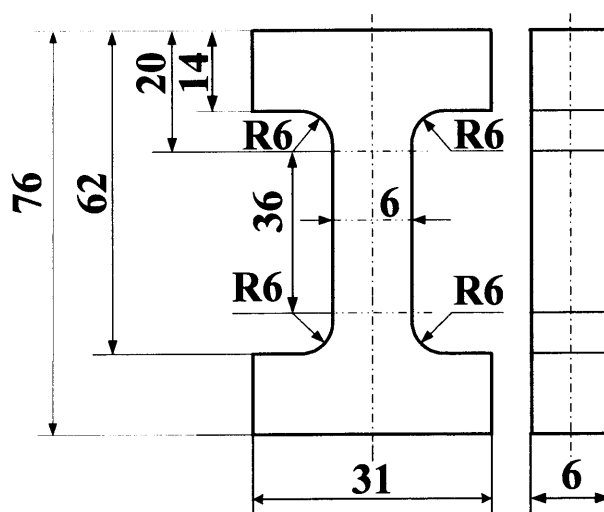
Shapes and size of mold for tensile exam. :[mm]
